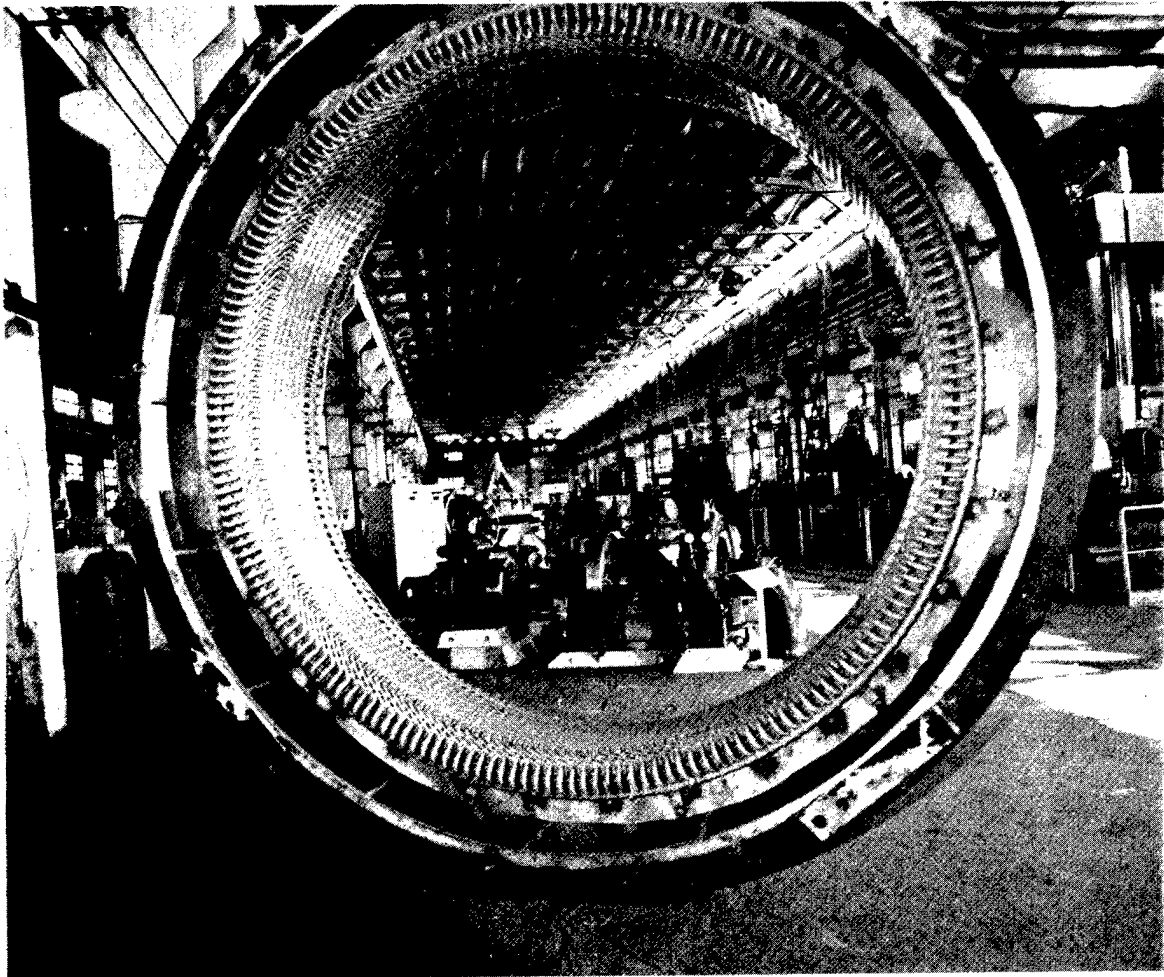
Inside view of the Nanping Electromachinery Plant in Fujian. This plant is a major turbo-pump manufacturer in China
